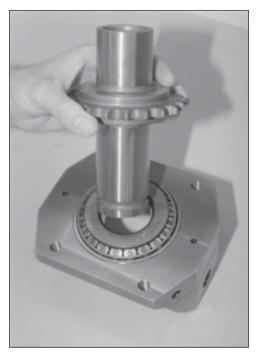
A. Sliding long stem of hex drive gear through bottom bearing.
